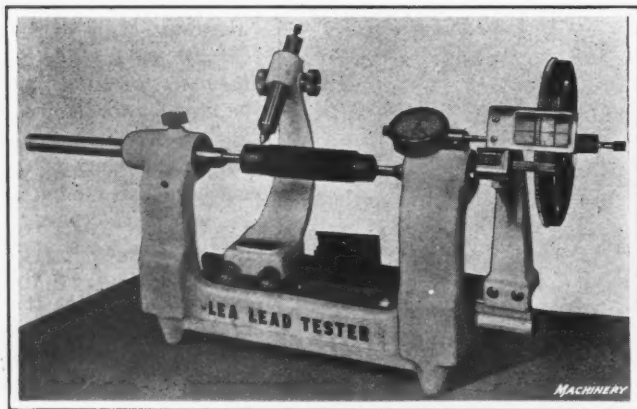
Lea Thread Lead Tester built by the West & Dodge Co.
